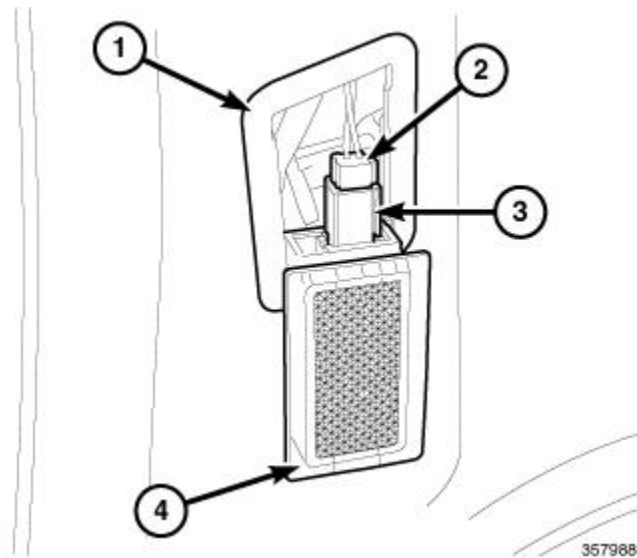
Trunk Lamp Lens, Connector Receptacle & Mounting Hole
